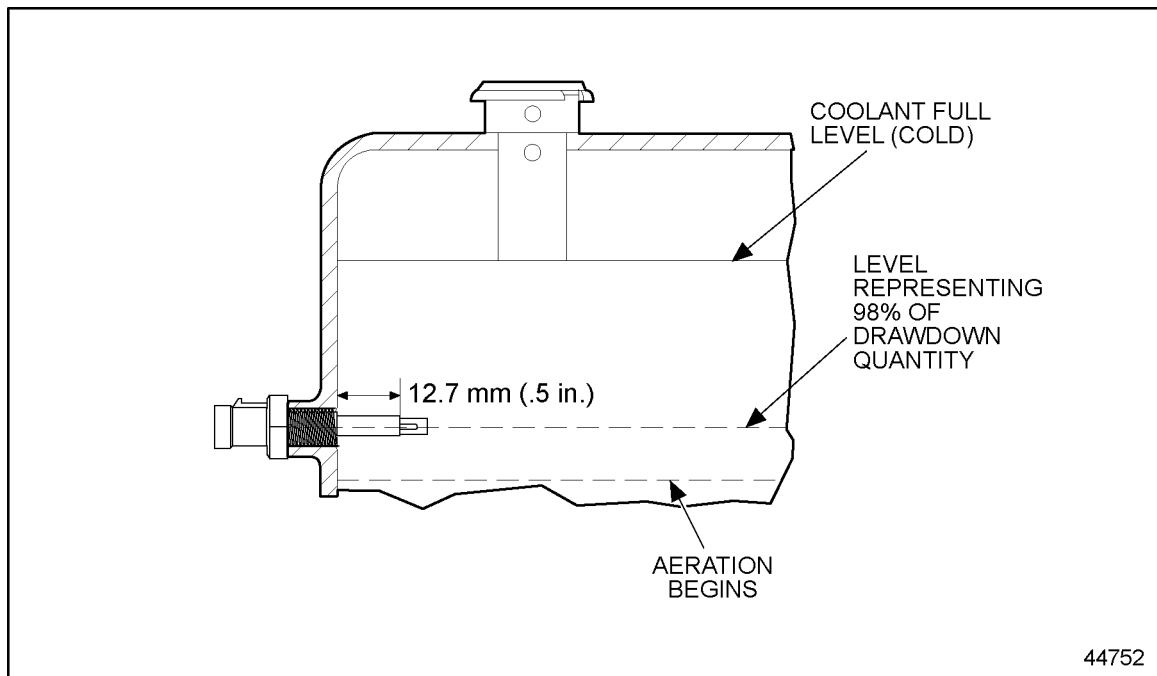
Engine Coolant Level Sensor Mounted in Radiator Top Tank
